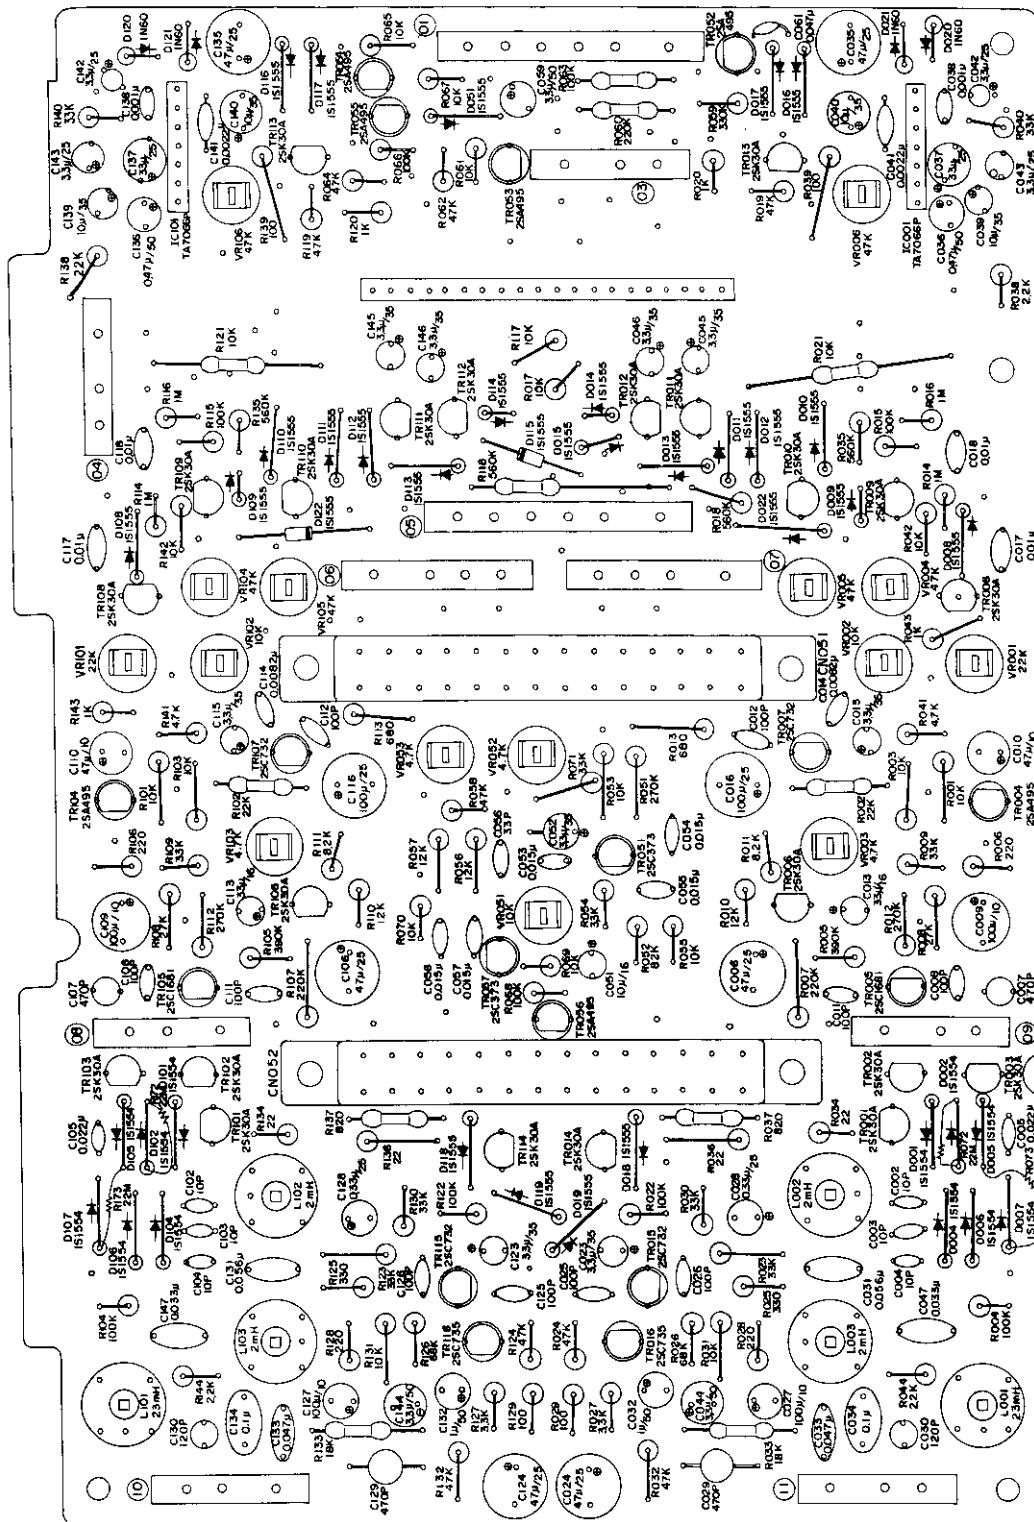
Top View of Pre-amplifier P.C. Board, PC-001
